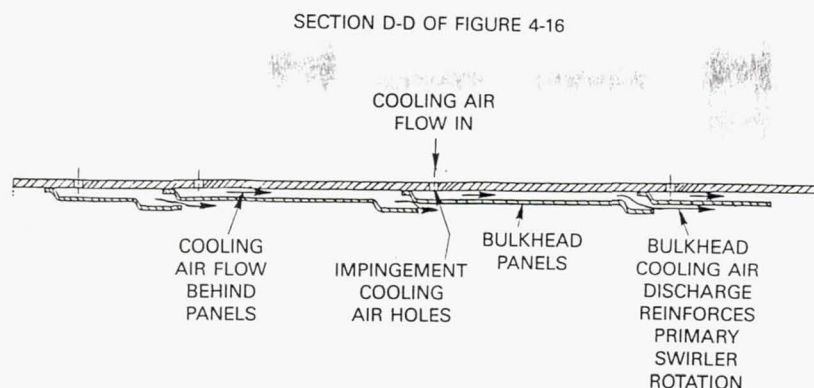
Mark IV Combustor Bulkhead Cooling System.
